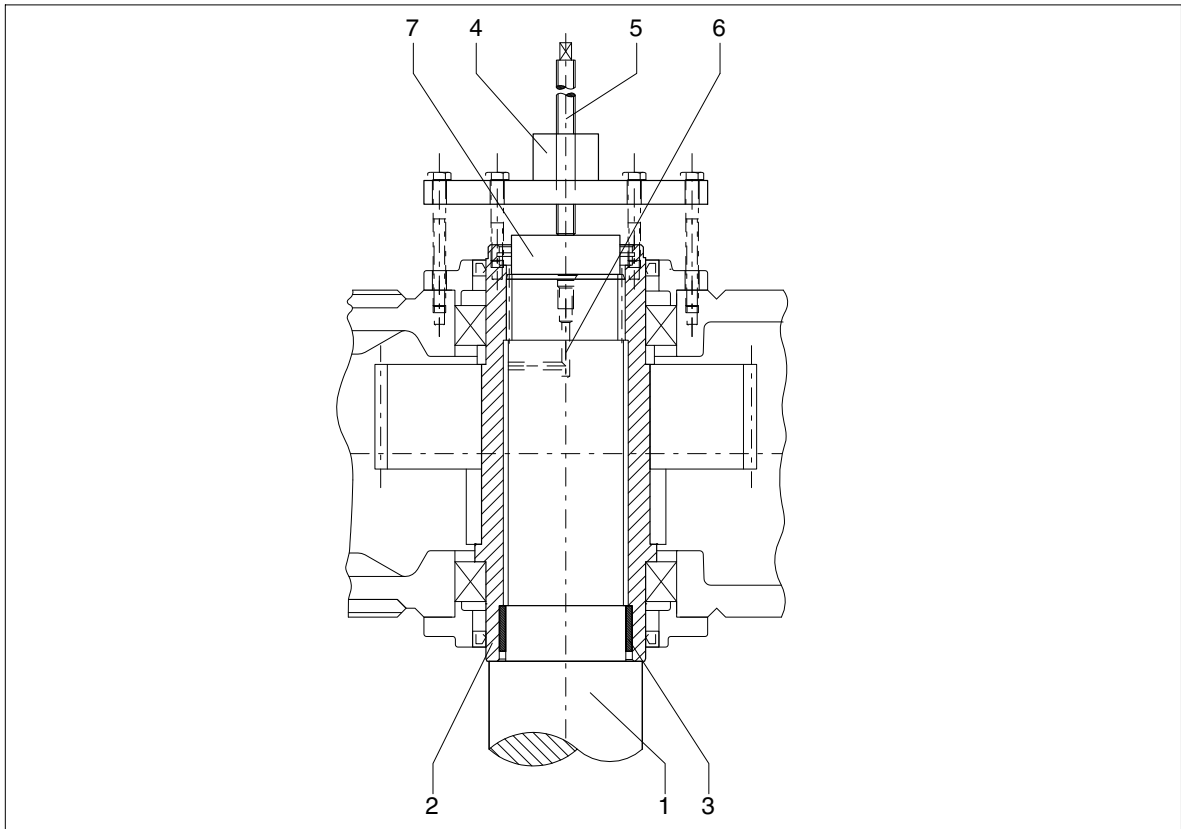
Hollow shaft with splines, demounting with hydraulic lifting unit
